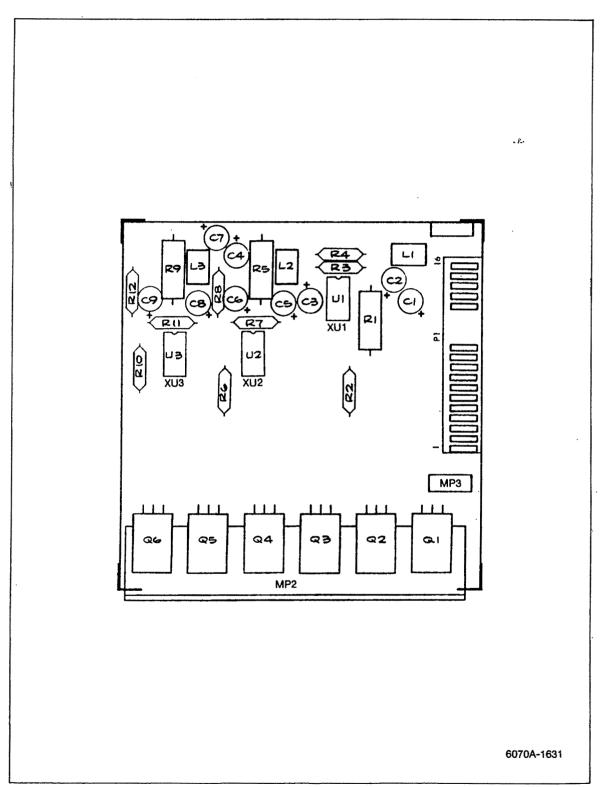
A6A3 +5V Series Pass PCB Assembly
